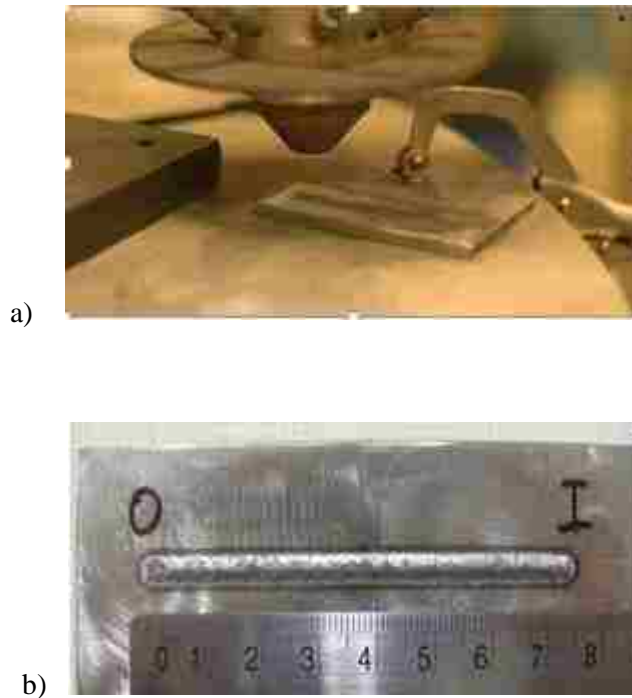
a) Single bead sample is being prepared b) Single bead is shown in 3.0 inches length [Courtesy of the industrial partner]
